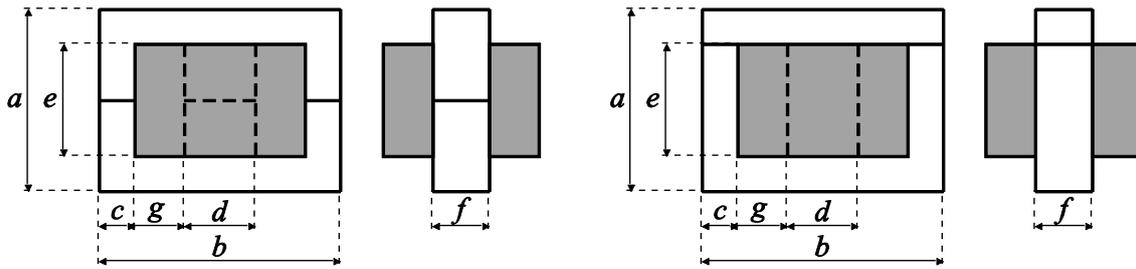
EE core (left) and EI core (right) with windings (grey) and geometrical dimensions.
